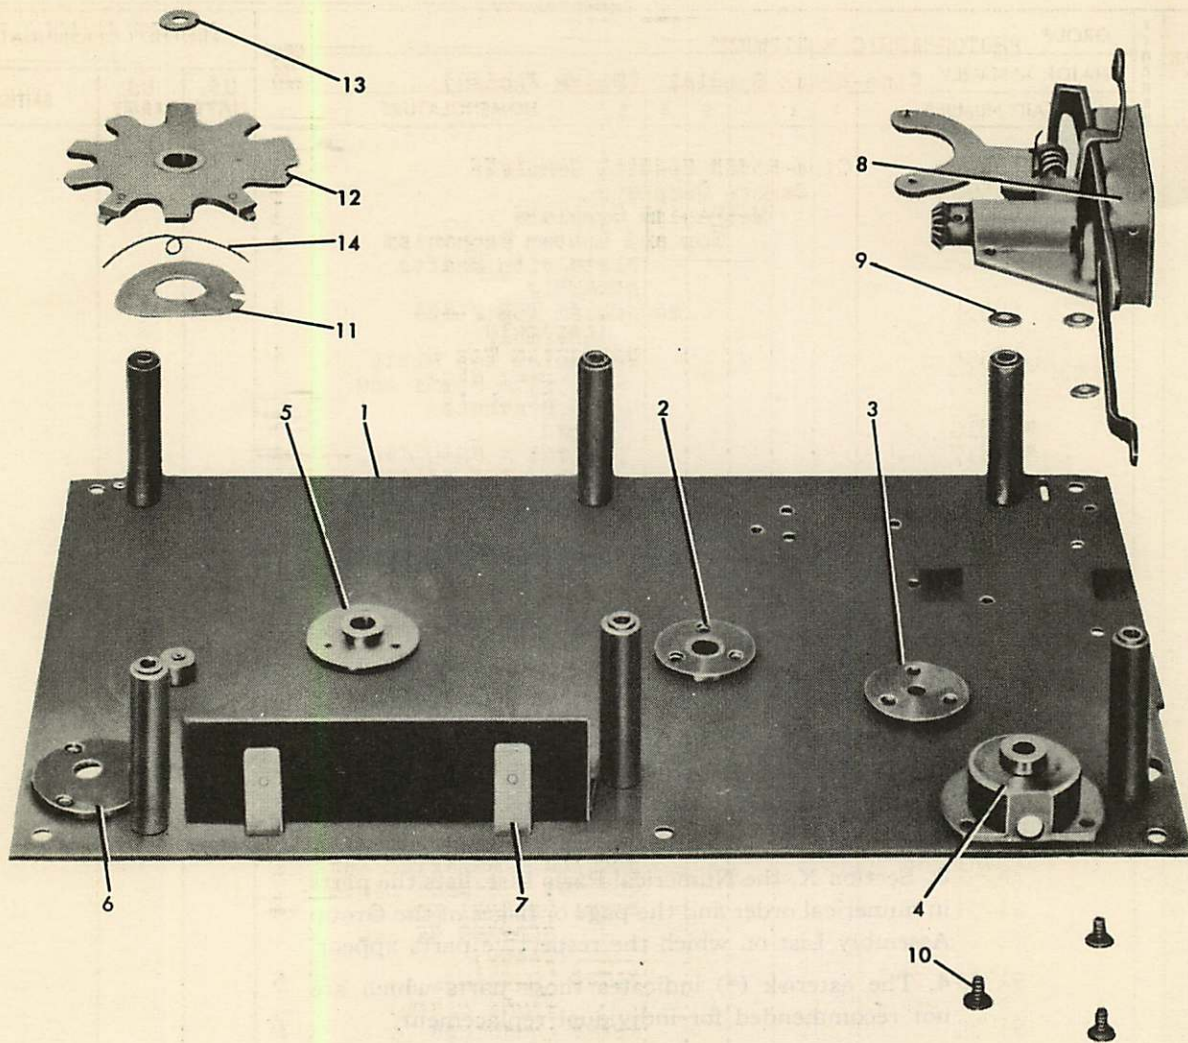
Mechanism Top Plate—Parts Exploded from Bottom
